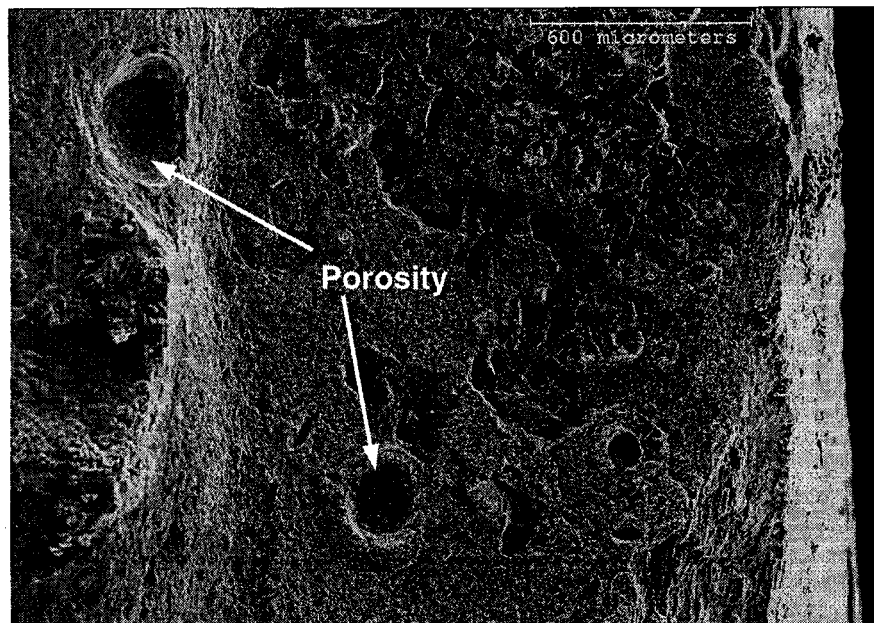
Fracture Surface of Test Specimen T13-1
